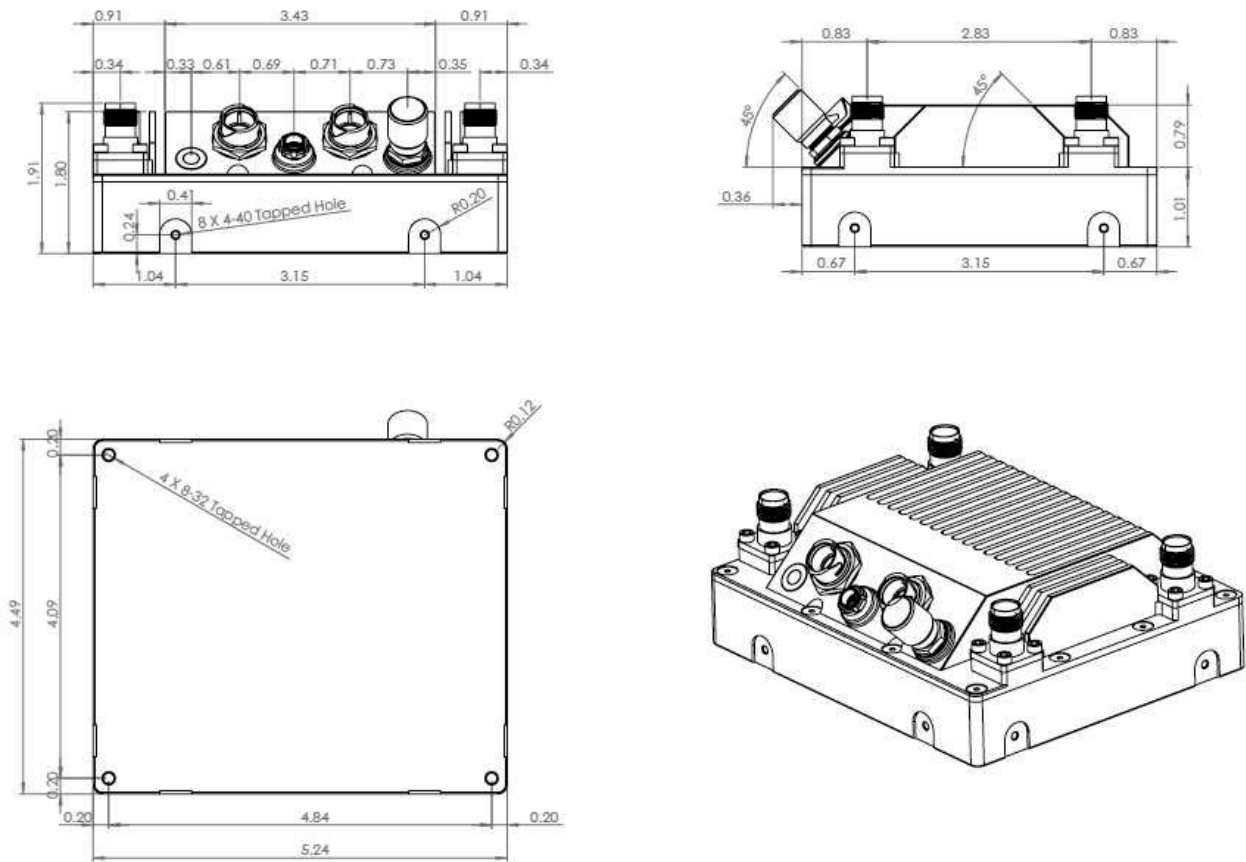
SC4400 Mechanical Drawing (top) and Mounting Pattern (bottom)
